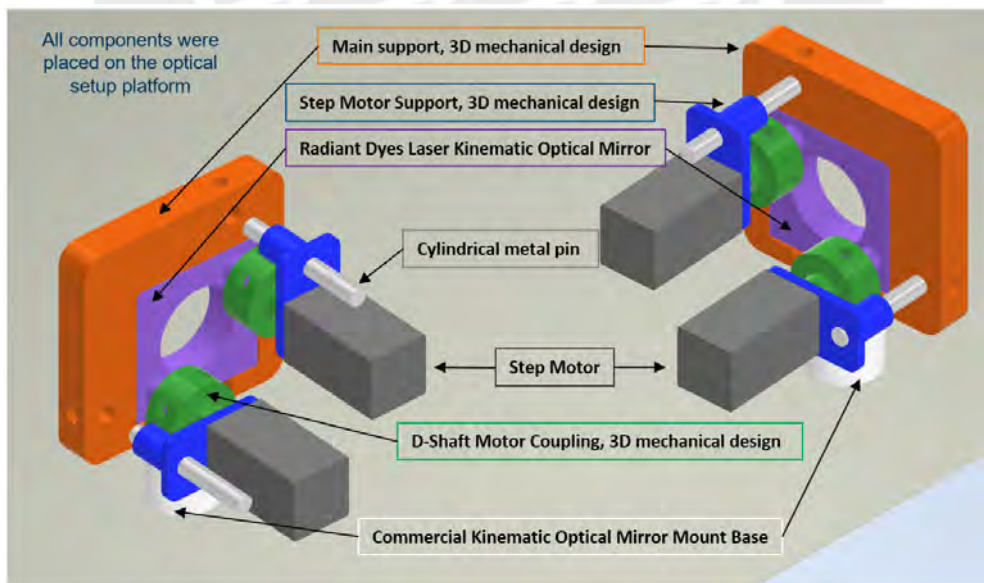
Assembled system mounted on Radiant Dyes Laser Kinematic Optical Mirror
